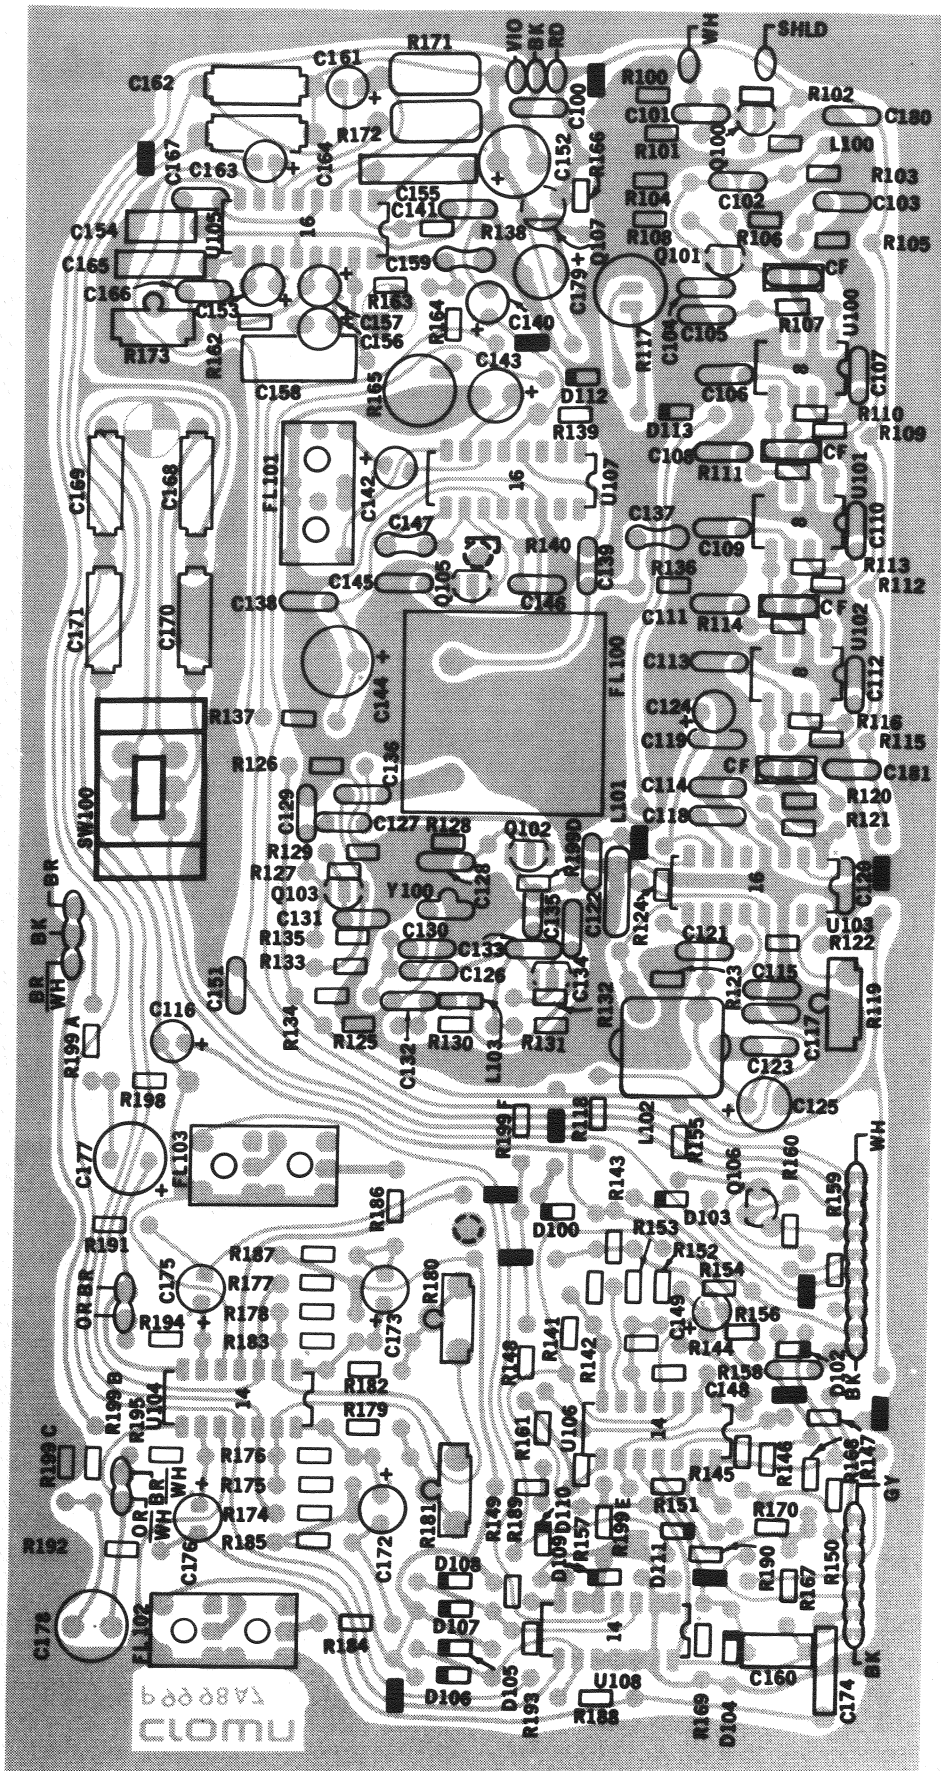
Main Module Component Board Layout; #Q42499-6
